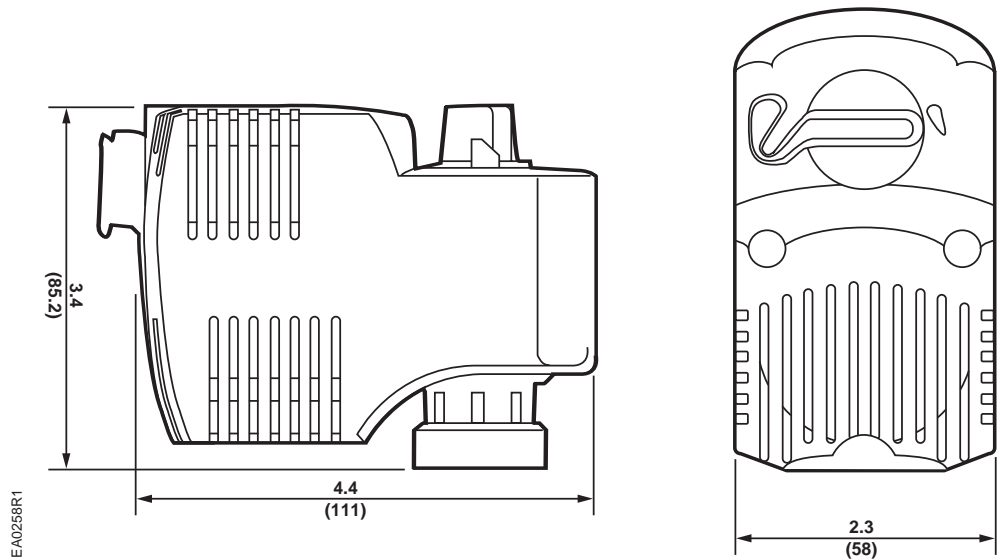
Dimensions of the ESZ4 & ESZ5 Series Actuator.
